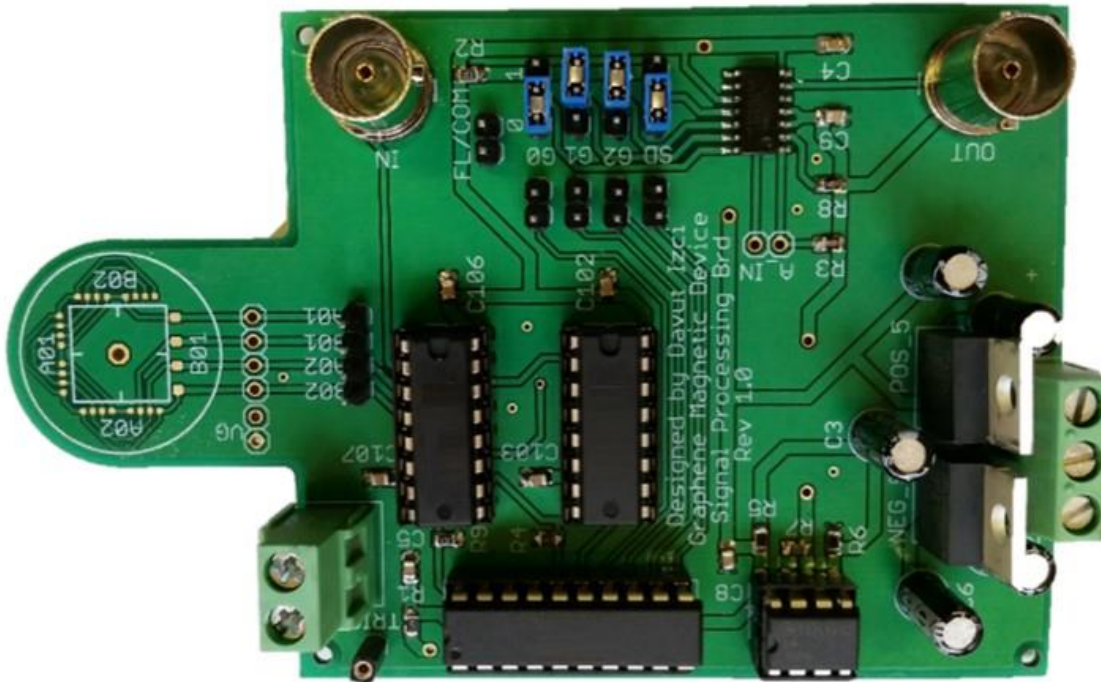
Constructed system board PCB. The sensors can easily be mounted on the tongue shaped tip or can be remotely connected via specified pins provided. The on-board current biasing mechanism can be used for biasing the Hall elements. The PCB also allows a current source to be connected externally for biasing.
